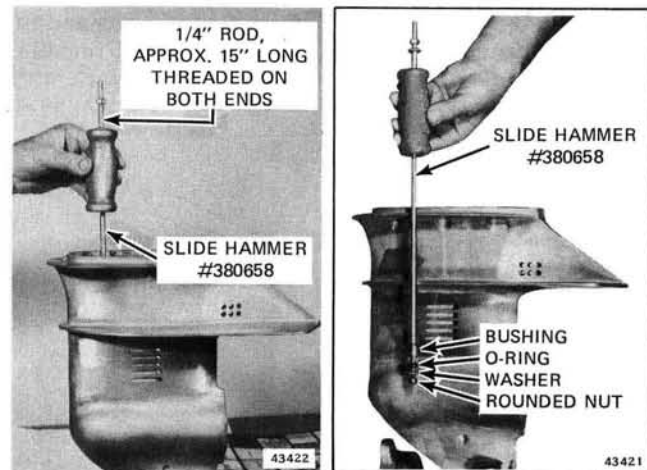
Pulling Shift Rod Bushing, O-Ring and Washer
